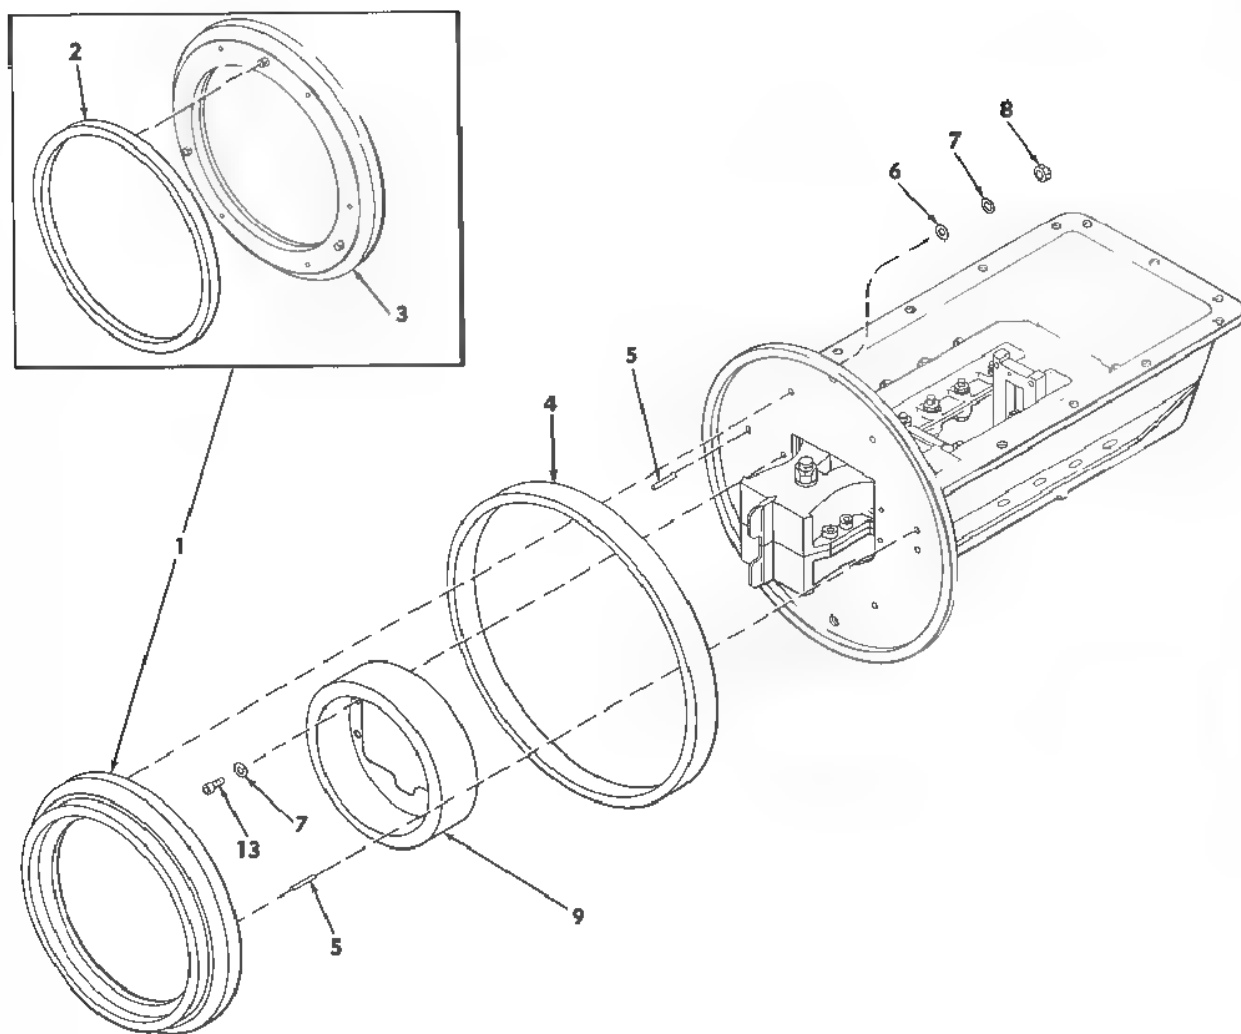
WAVEGUIDE ASSEMBLY /9141735/-EXPLODED VIEW
